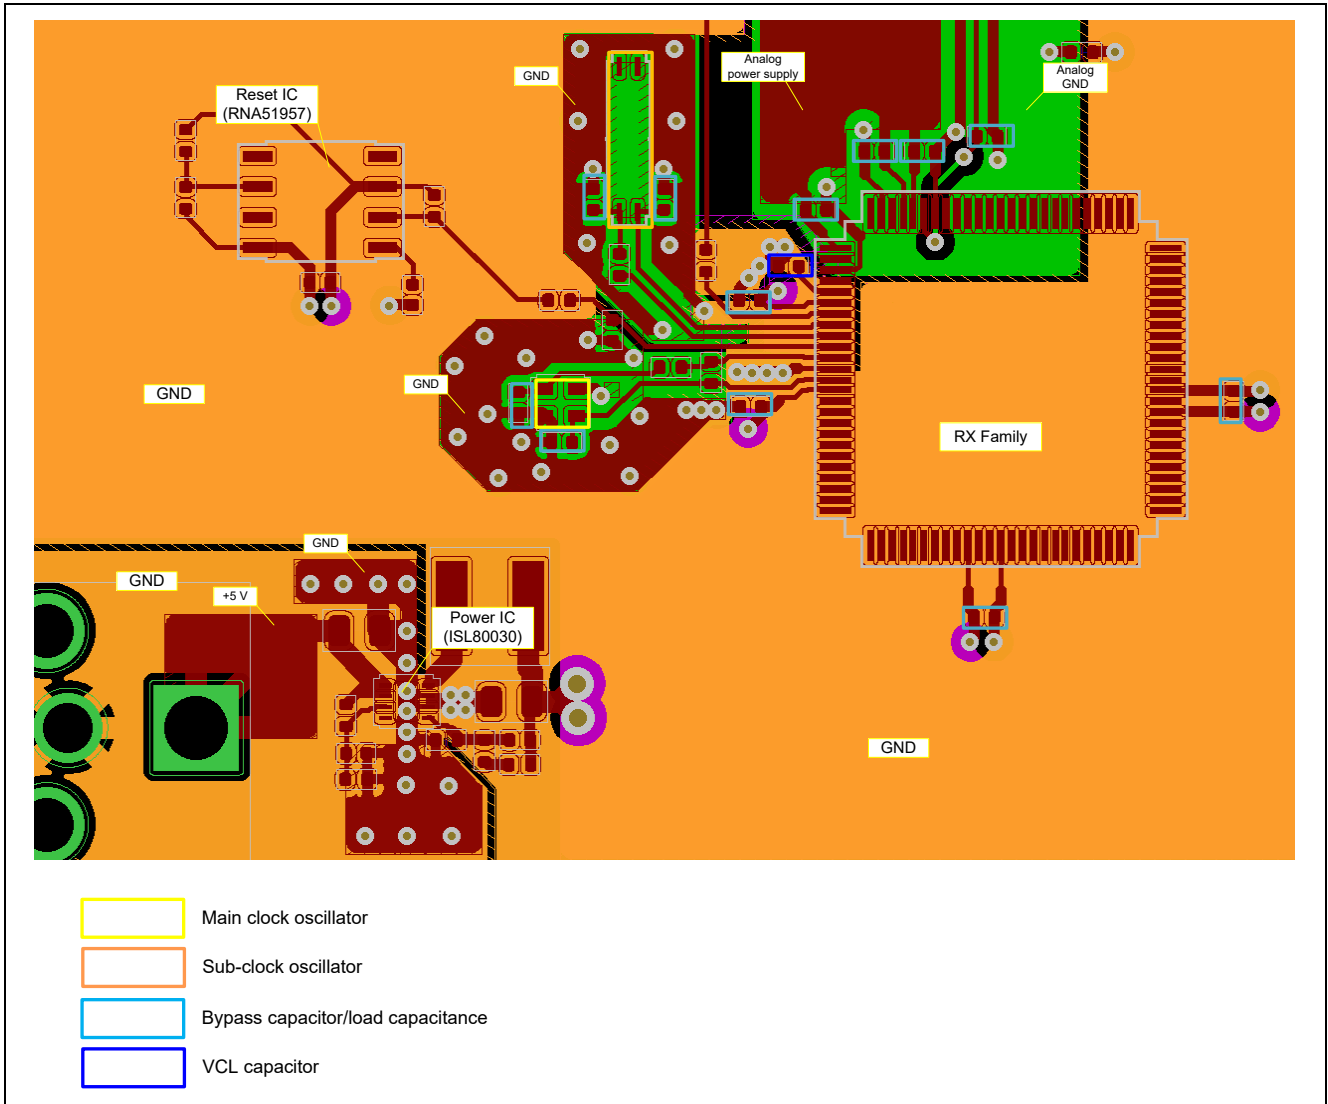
Example Board Wiring Pattern (Four-Layer Board)
